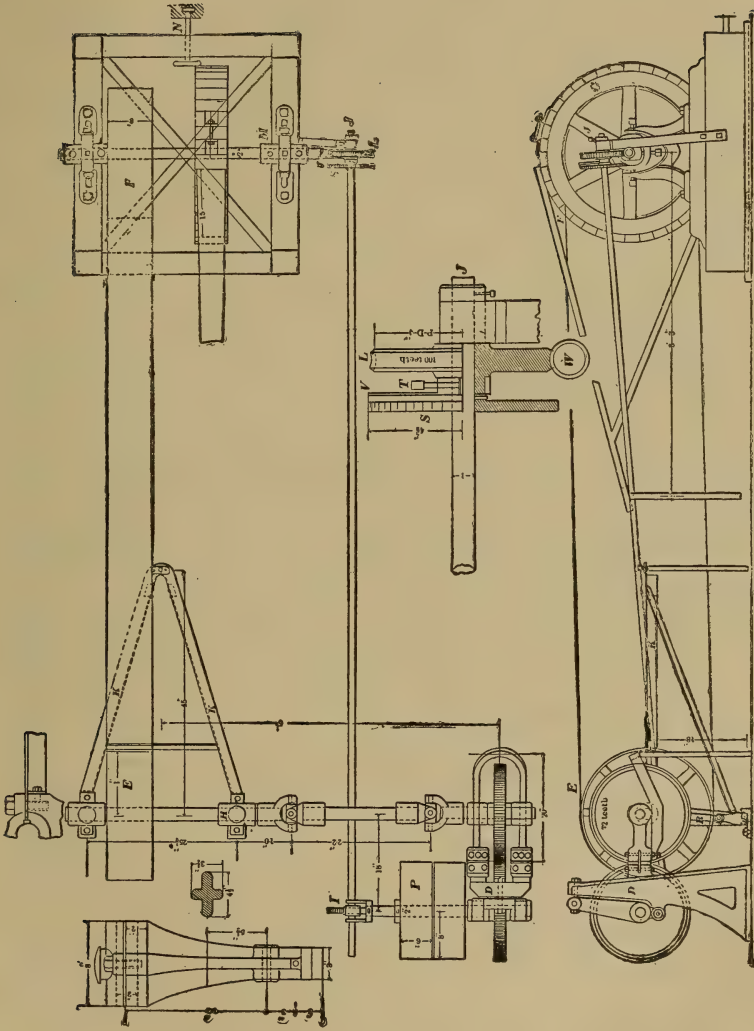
BELT-TESTING MACHINE OF SIBLEY COLLEGE.
